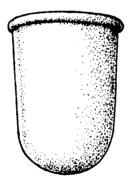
The base profile of a dip mould used for making "wine" bottles. (Great Britain. Parliament. Sessional Papers 1842: 353. Drawing by D. Kappler)
